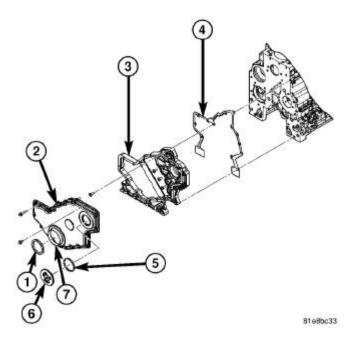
Front Cover Assembly Components Courtesy of CHRYSLER GROUP, LLC
